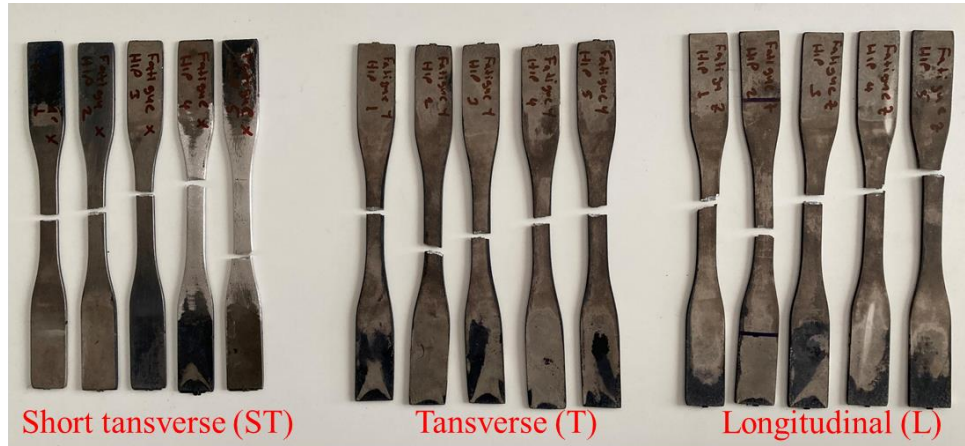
HIP post-treated fatigue test specimens after fatigue fracture.
